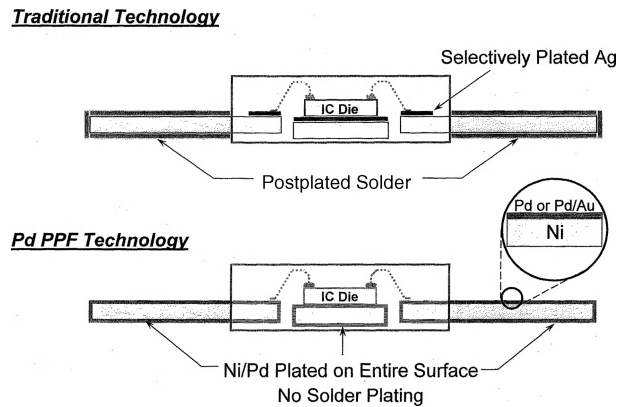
Schematic cross sections of leadframes plated with silver/solder or nickel/palladium after die attachment, wirebonding, and encapsulation and before trimming and forming.
